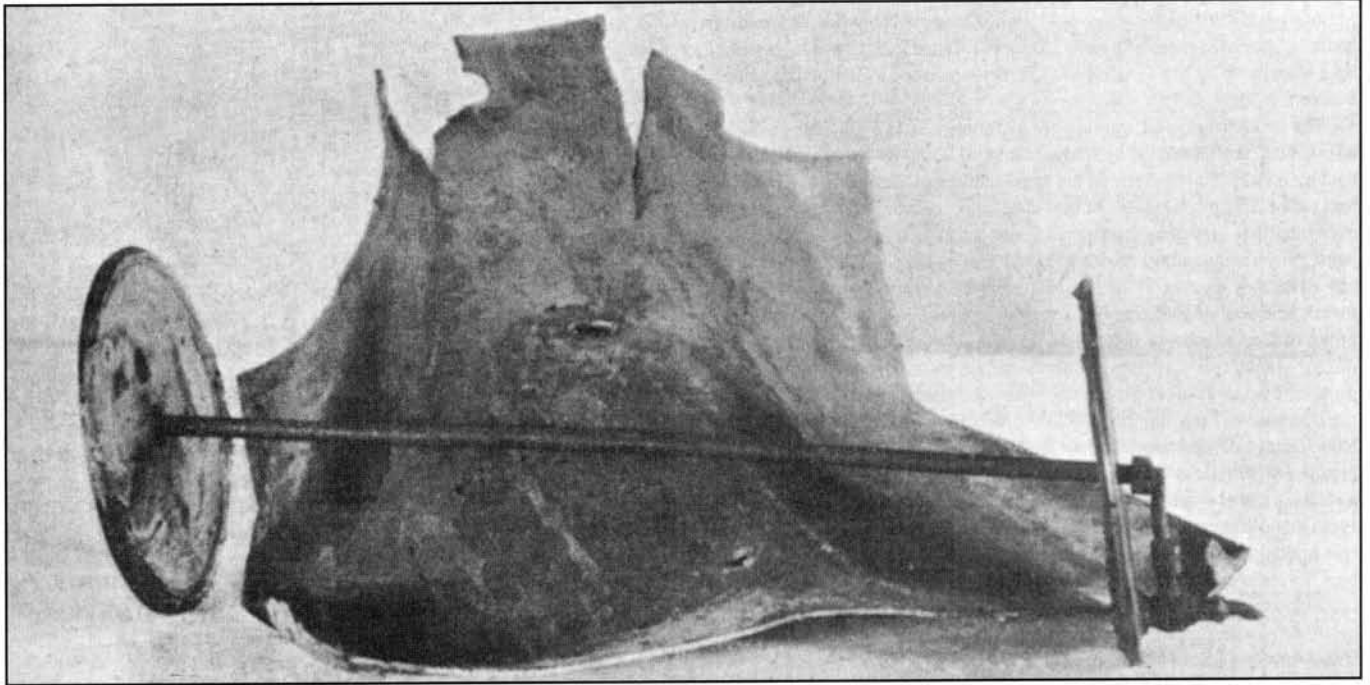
Explosion of a Model Boiler: The Shell (showing inside surface), Stay, and End Plates after the occurrence.
